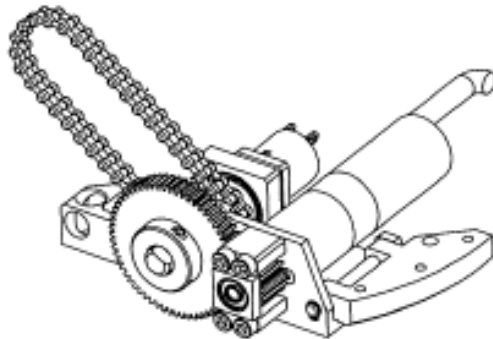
Example fin actuation assembly from the current REMUS 100 AUV
